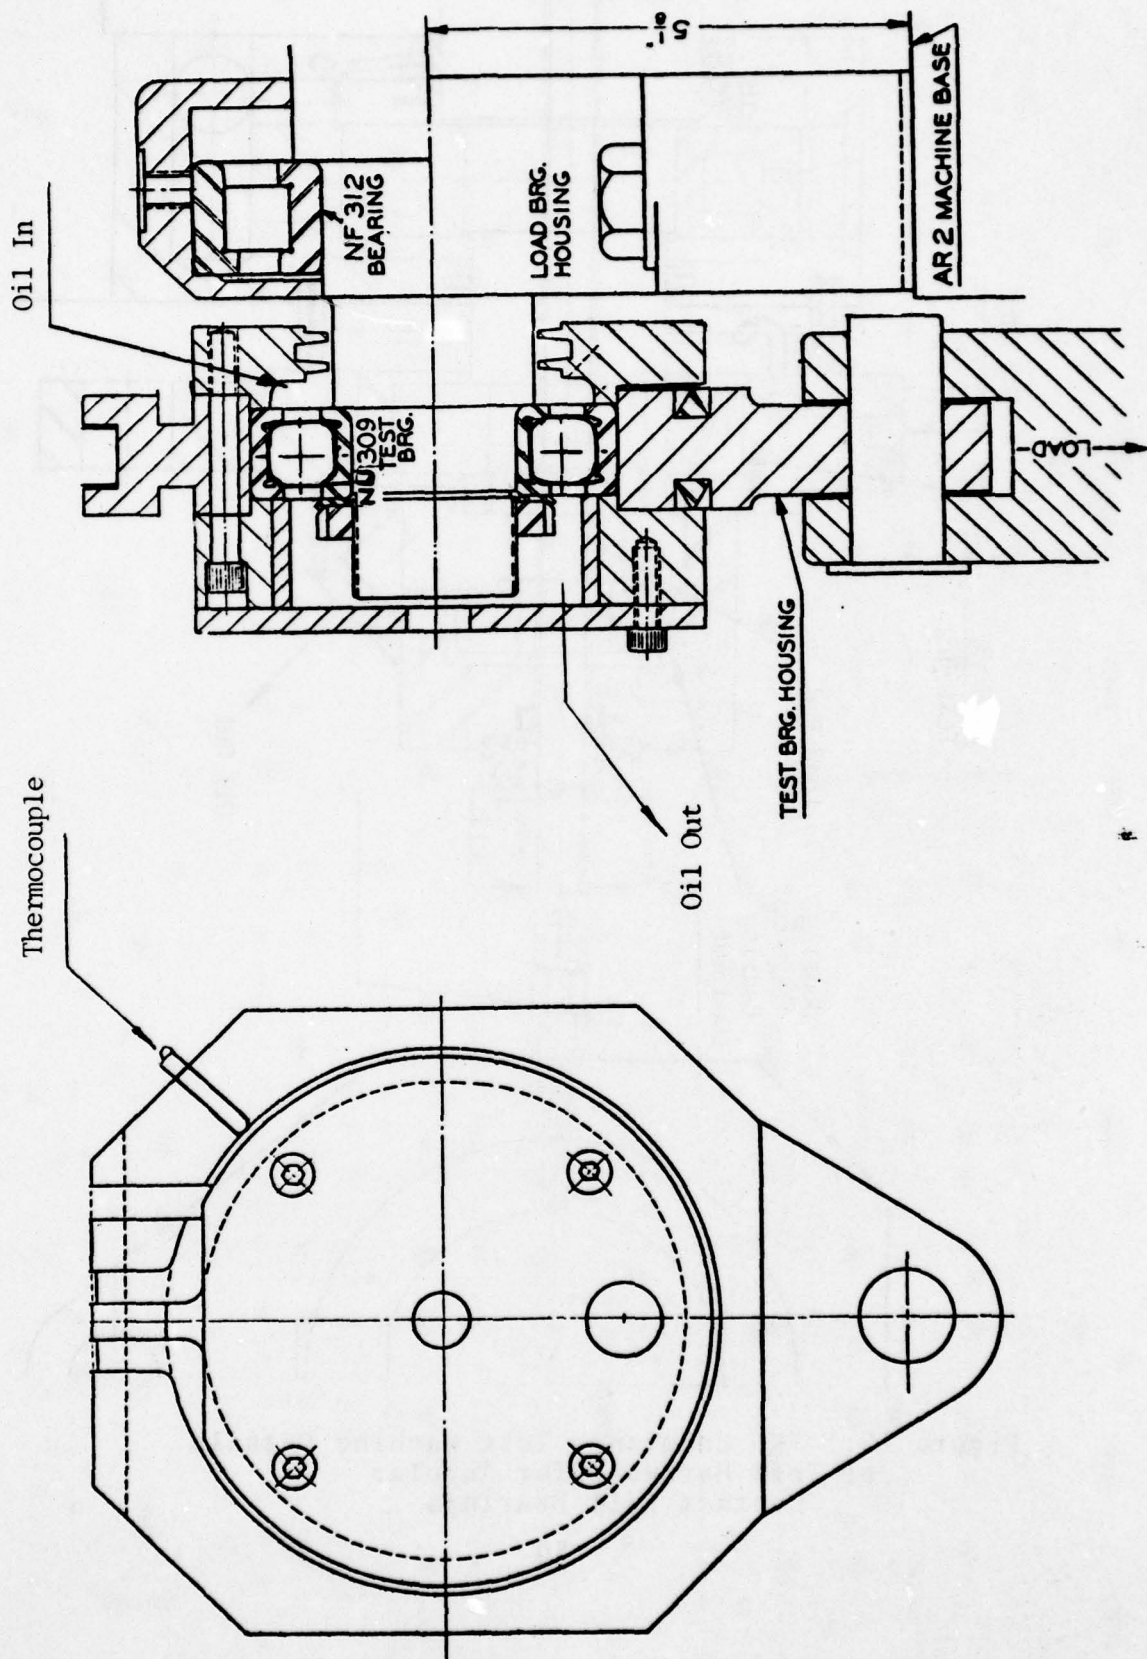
SKF Endurance Test Machine Details of Test Hardware for Cylindrical Roller Bearings
